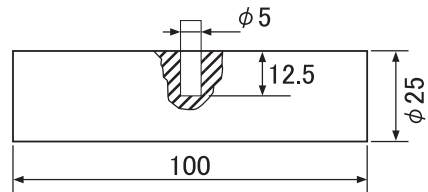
Cylindrical specimen with a drill hole¹⁸⁾.
